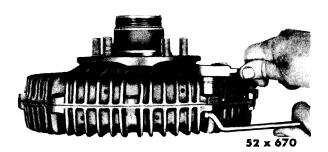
Removing Housing Attaching Bolts (Front Disc Brake)
